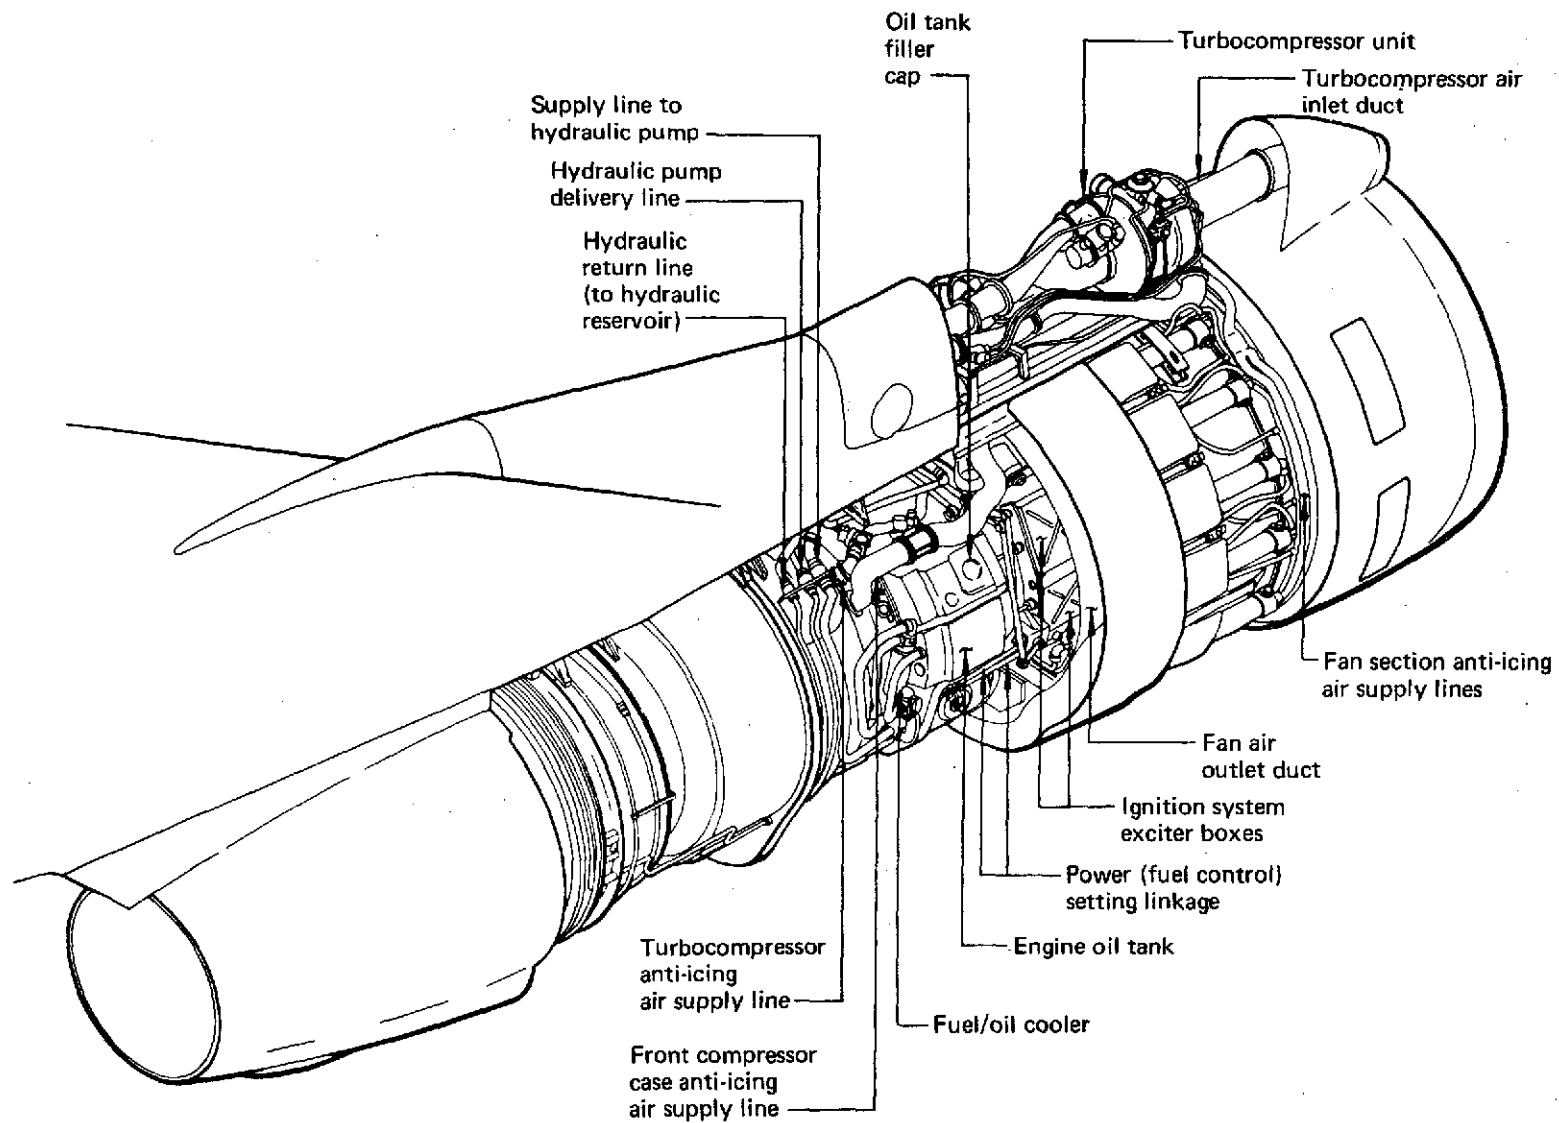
707/JT3D-3B ENGINE RIGHT SIDE VIEW
